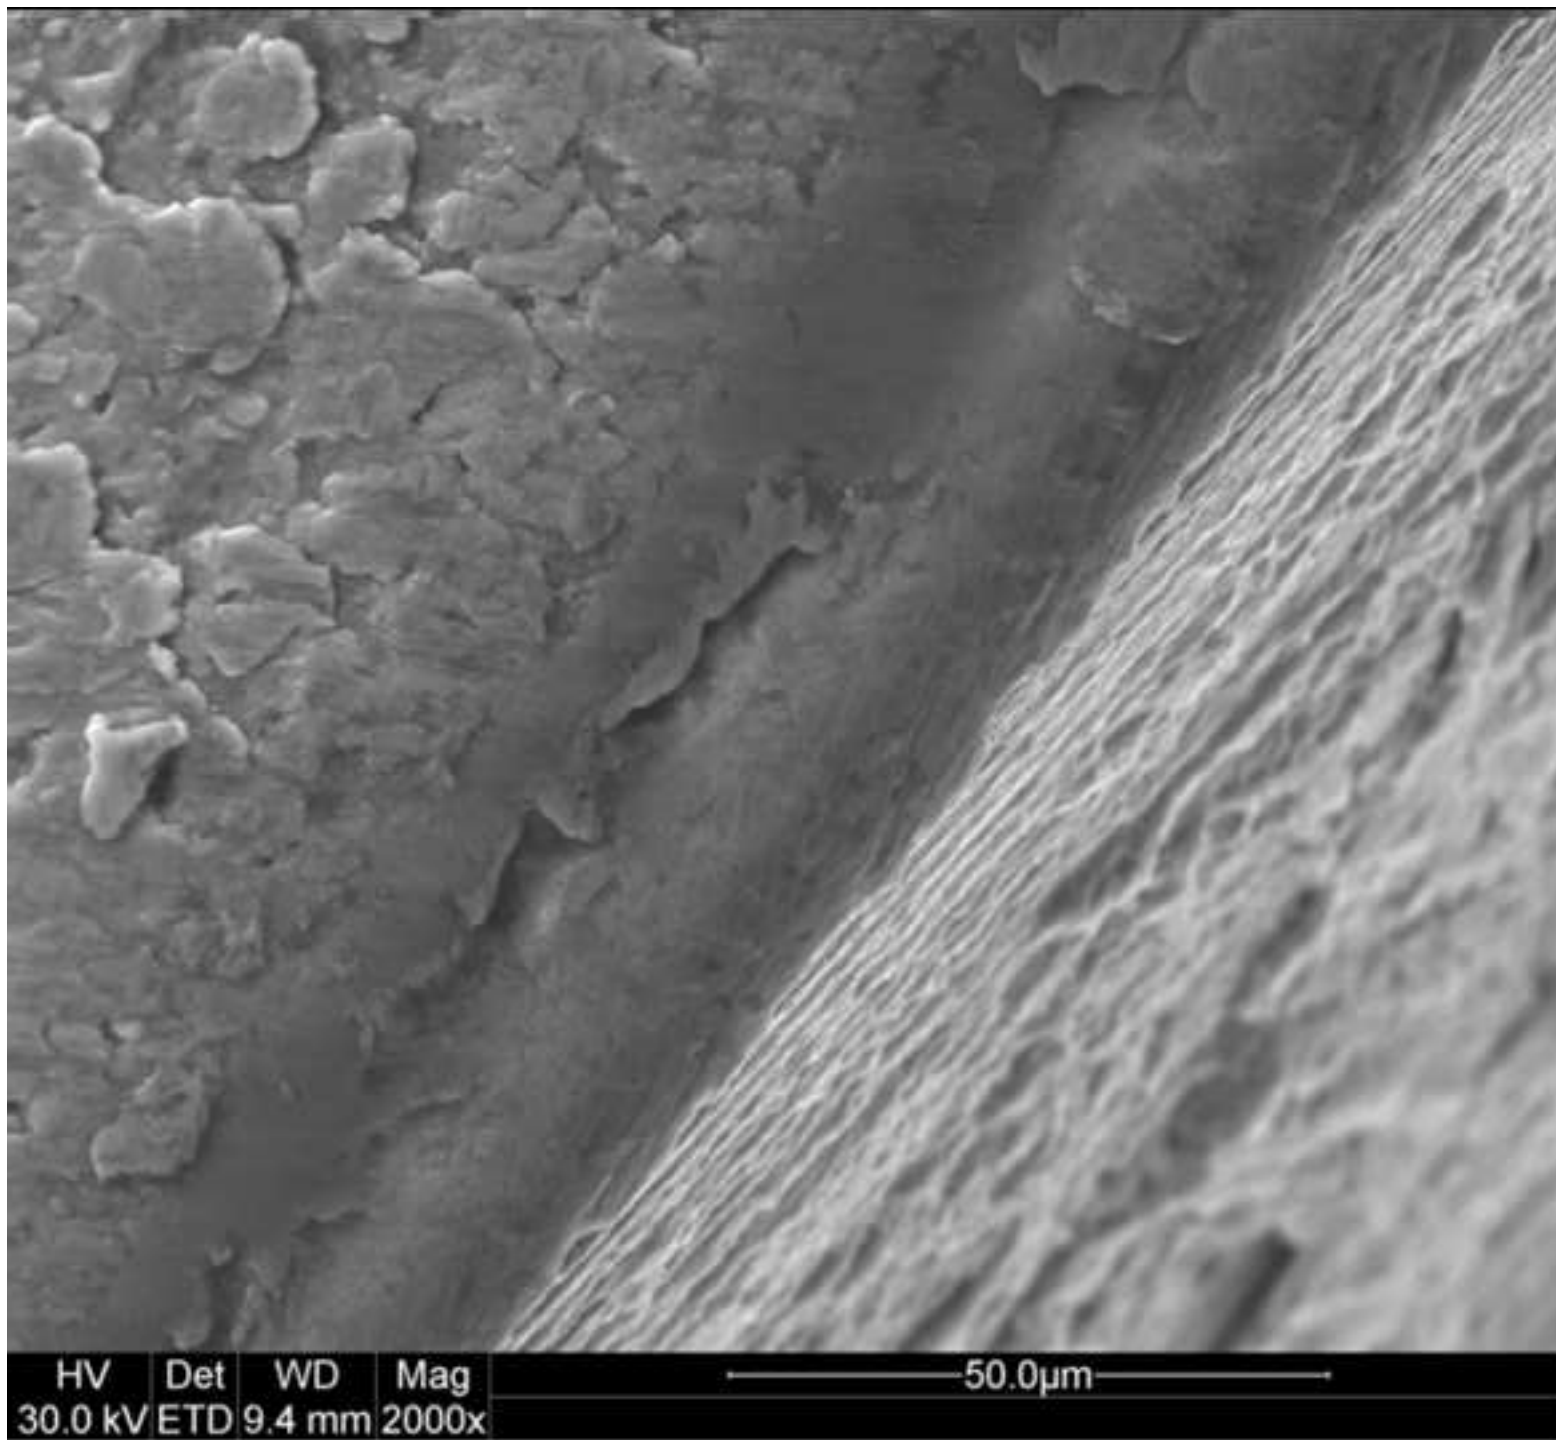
(d). Corner of Run 4 end mill after 36m cut length.
